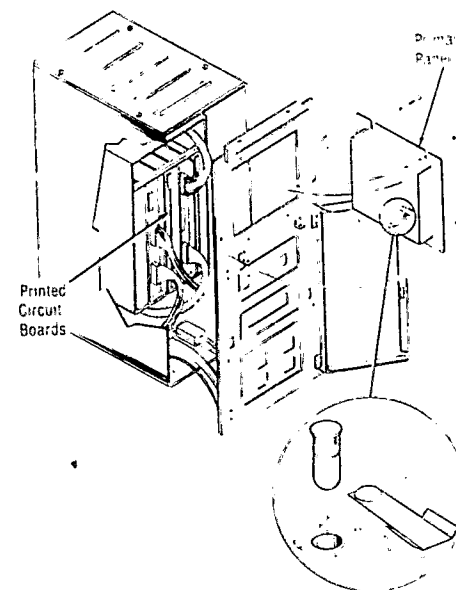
REMOVAL OF PRIMARY PANEL.
